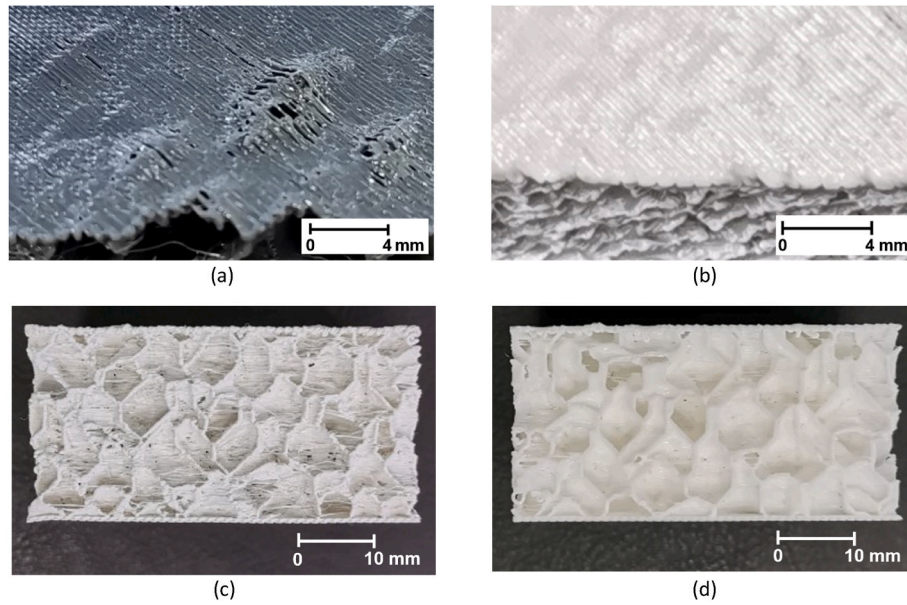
Details of the printed specimens: (a) close-up of the top layer of a specimen exhibiting a fill defect; (b) close-up of the top layer of a correctly fabricated specimen; (c) infill showing significant material stringing; (d) infill correctly fabricated with minimal stringing.
